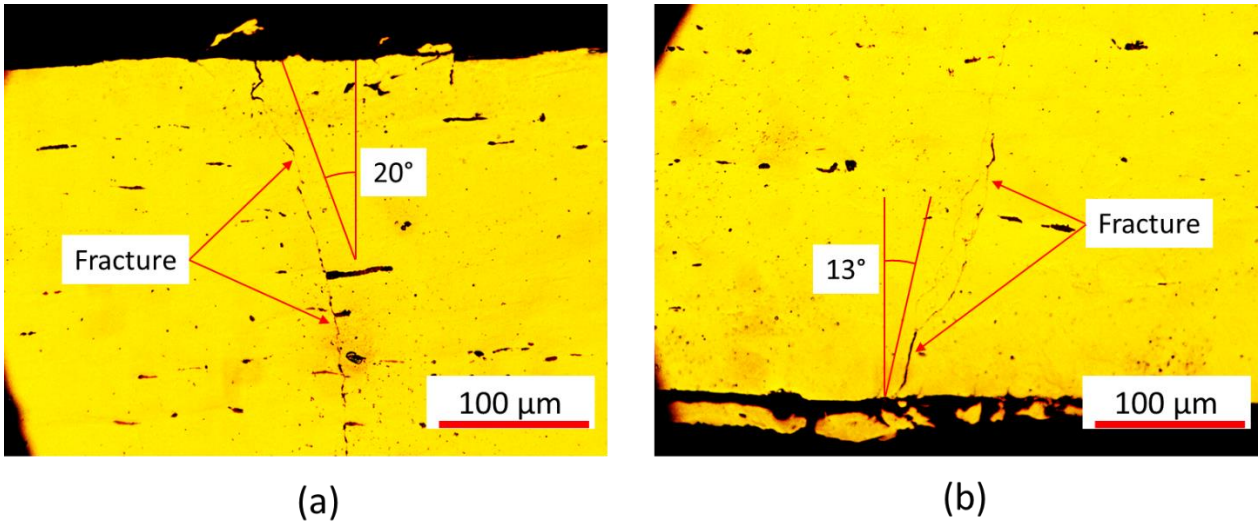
Sectional view (shaft longitudinal section) of two different cracks (a) and (b) on shaft S25 (bushing on the right side)
